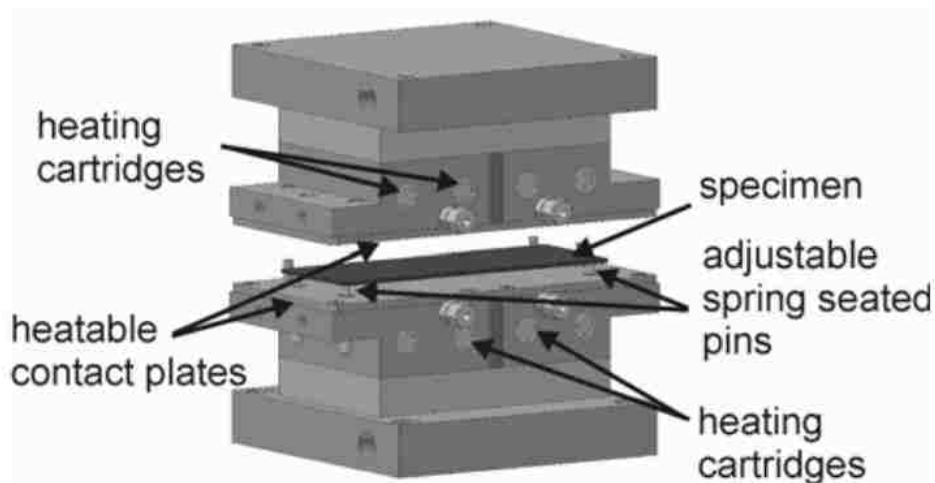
Schematic drawing of the quenching tool with integrated heating cartridges [15].
